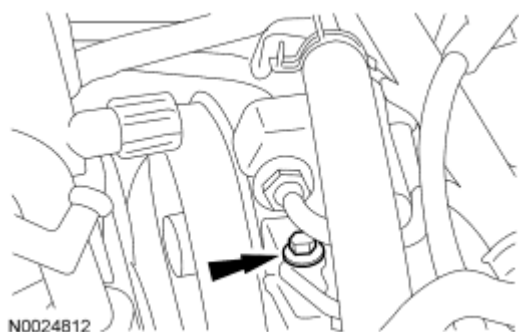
Locating Coolant Pump Outlet Tube Bolt
